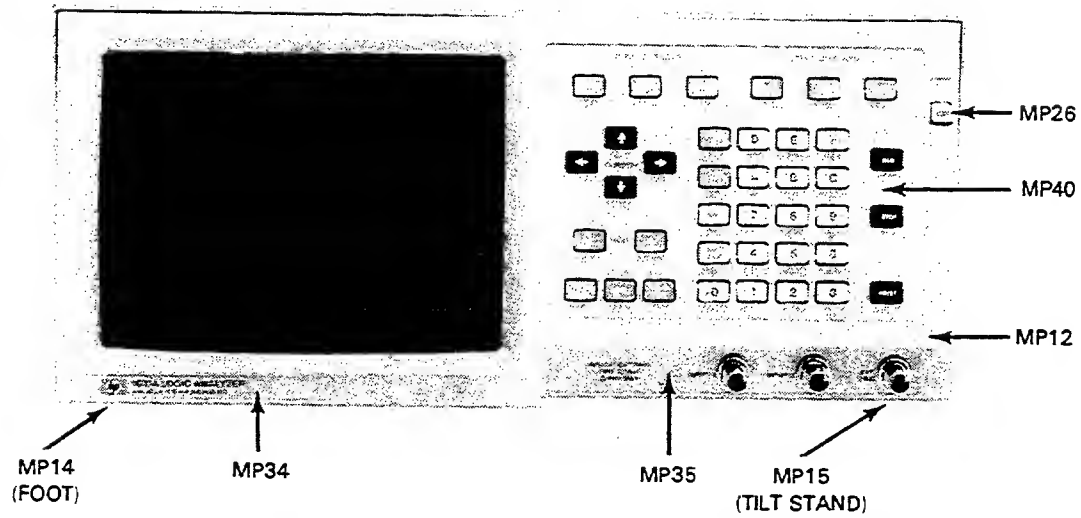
Mainframe Mechanical Parts Locations (sheet 1 of 4)
